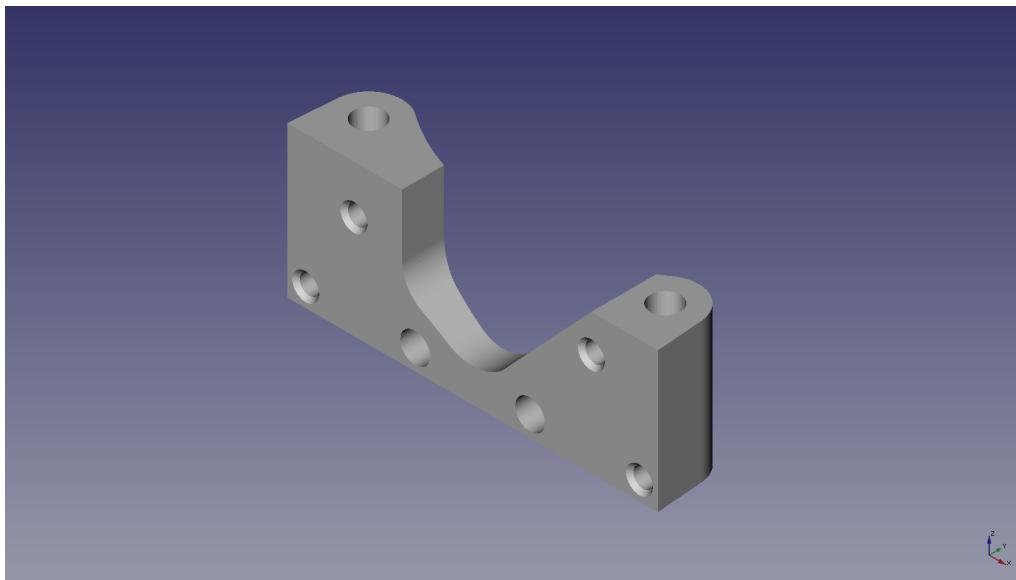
Begonia 3D Printed Y Rod Mount Render
